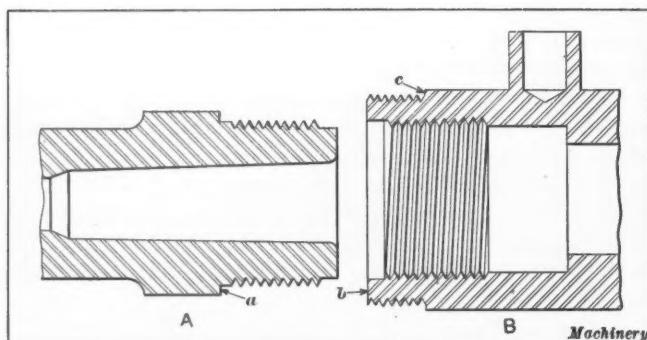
Screw Threads on Rifle Barrel and Receiver which must qualify or register accurately with Other Surfaces
